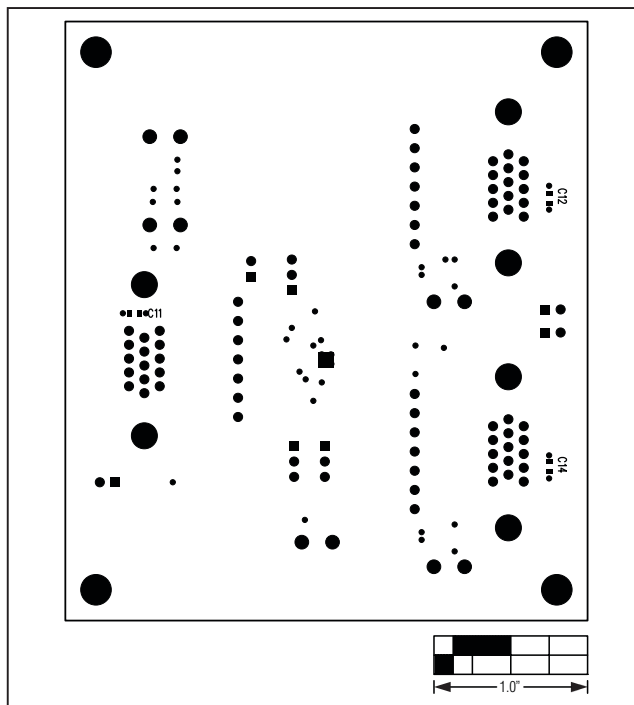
MAX4885AE EV Kit Component Placement Guide—Solder Side
